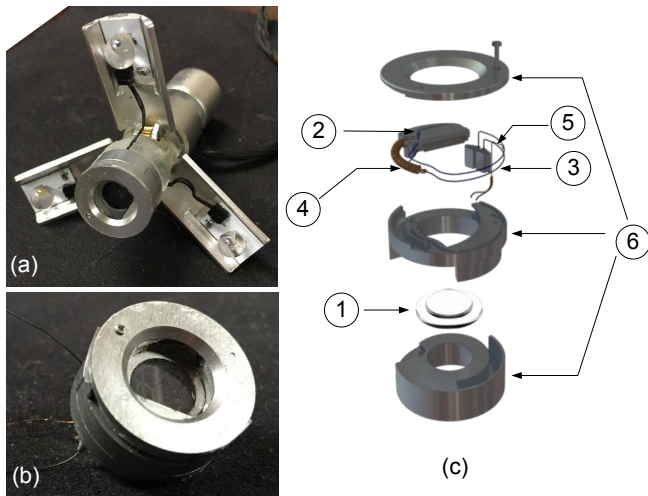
Prototype illustration of the proposed lens cleaning module. (a) Integrating the lens cleaning module with our transformable robotic camera [6]. (b) Module prototype. (c) Illustration of the module components. ①—optical glass cover; ②—wiping blade; ③—SMA wire; ④—micro spring; ⑤—micro thermistor; ⑥—aluminum structure.
